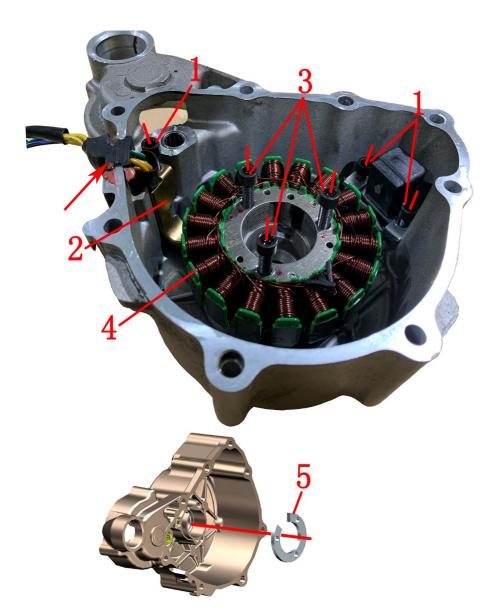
LEFT CRANKCASE		Remove left crankcase cover assembly	CHK	Q
